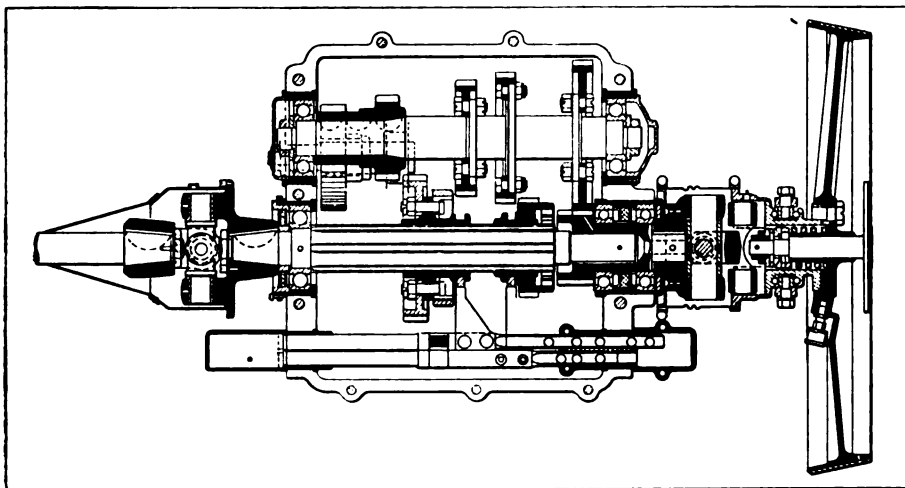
Sectional view of the clutch and transmission assembly showing the method of assembling the parts
